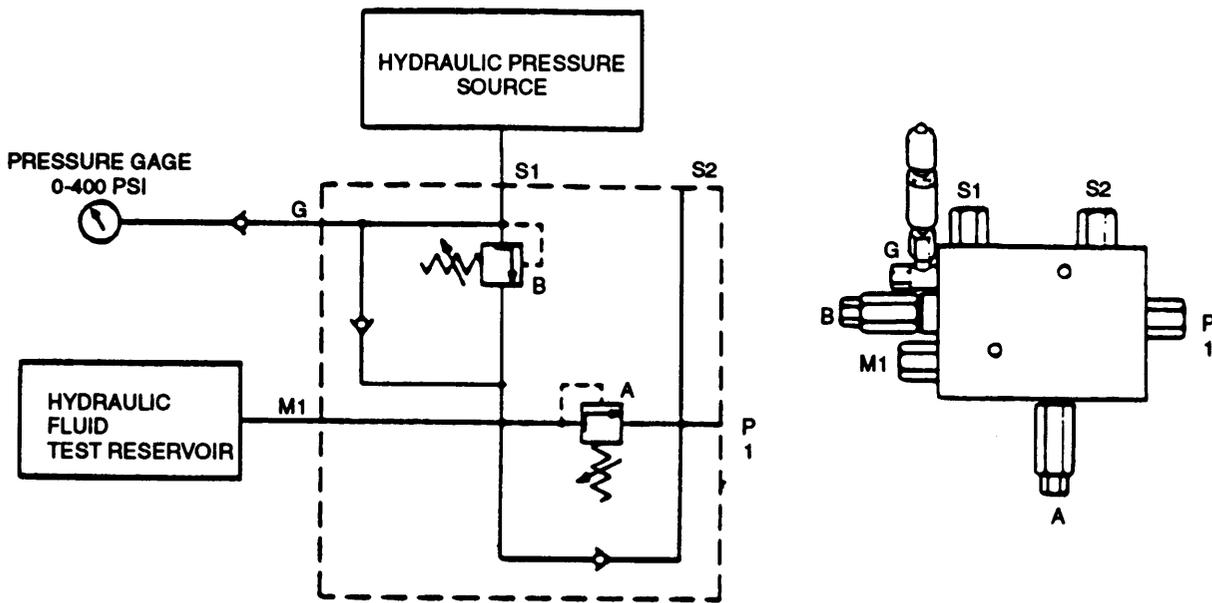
Cable Tensioner Valve Valve A, Adjust.
